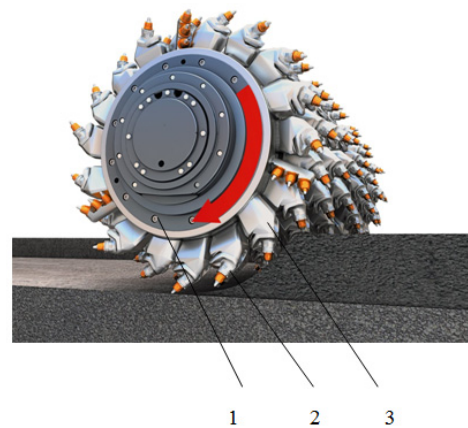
Milling drum: (1) drum; (2) milling tooth; (3) fastening support.
